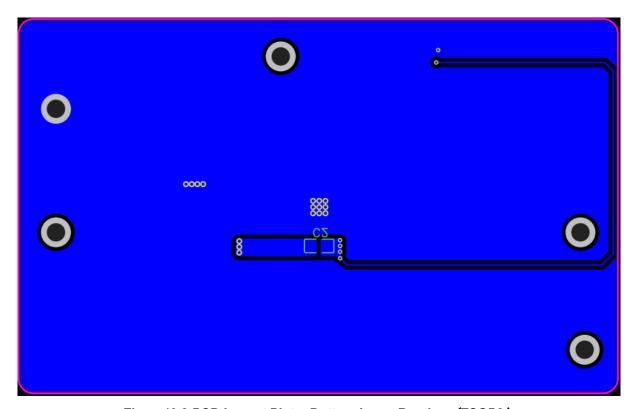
PCB Layout Plots: Bottom Layer Routing (ESOP8)
